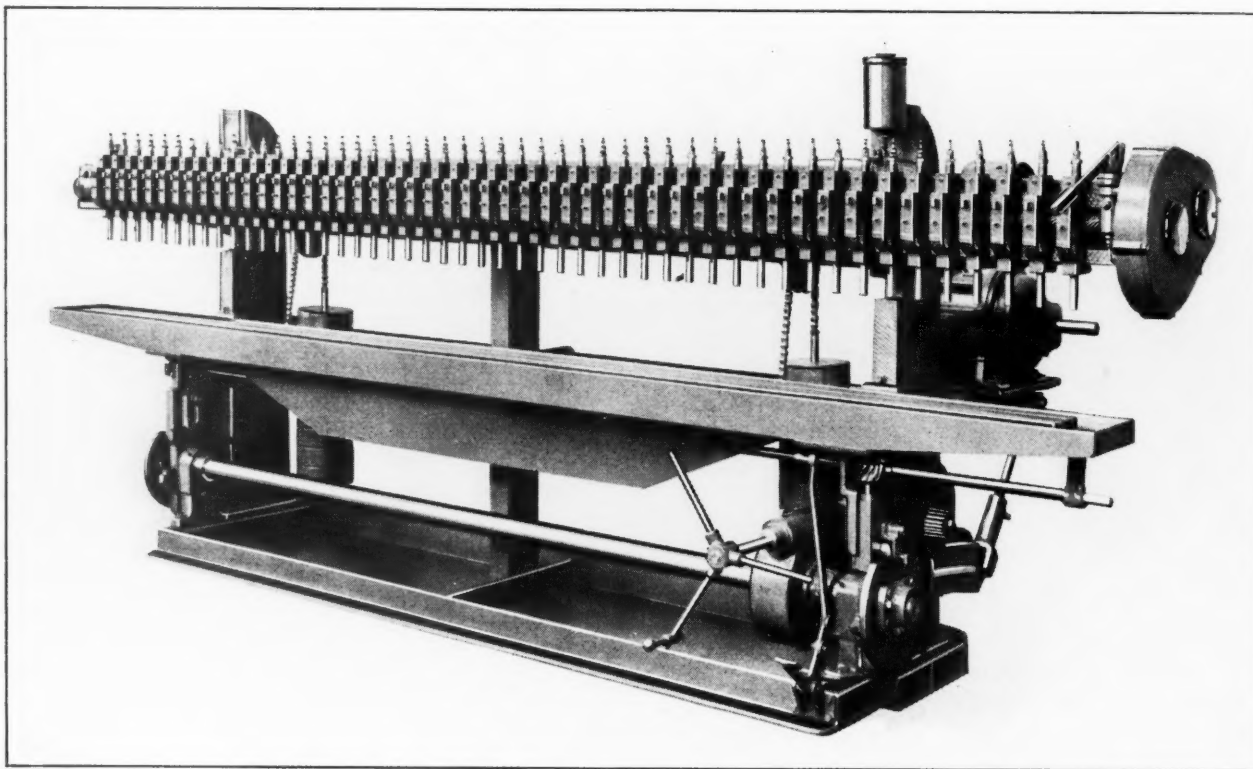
Drilling Machine of Welded Construction Having Forty-nine Spindles
